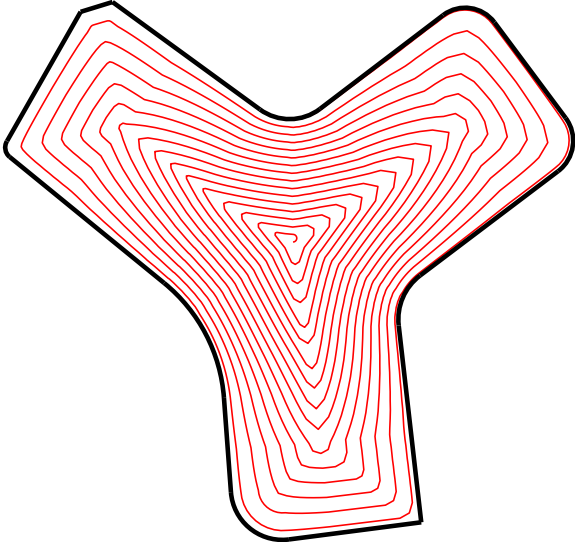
A raw tool path (highlighted in red) inside a simple pocket is shown.
